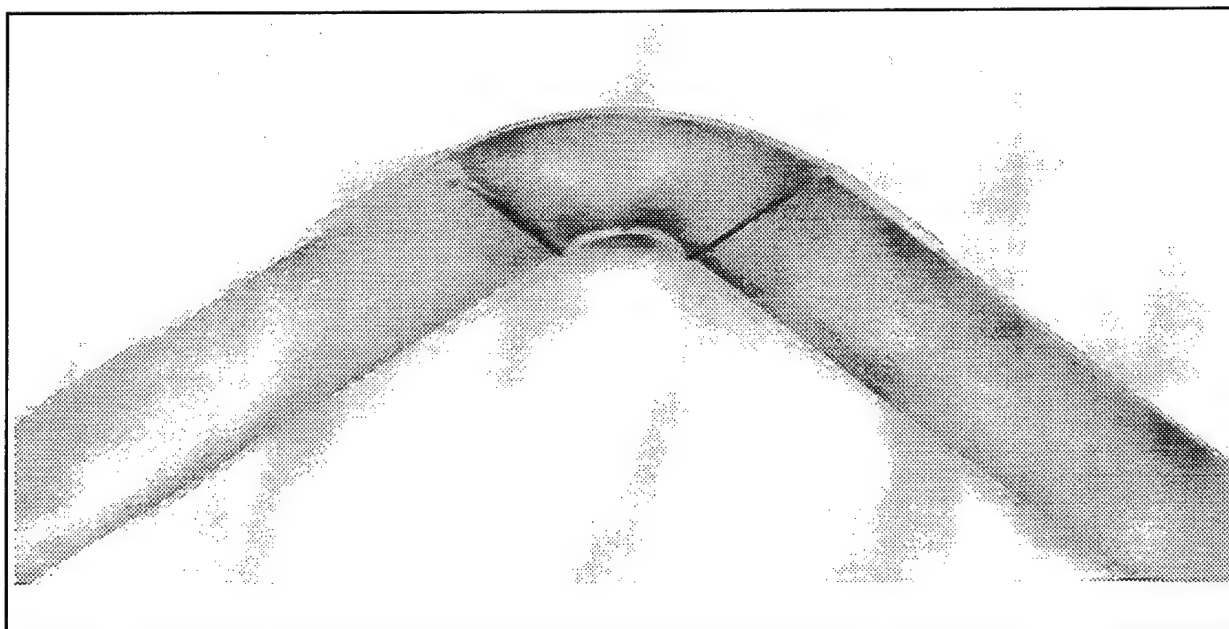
Sectioned copper pipe specimen used in blow-through coating application tests.
